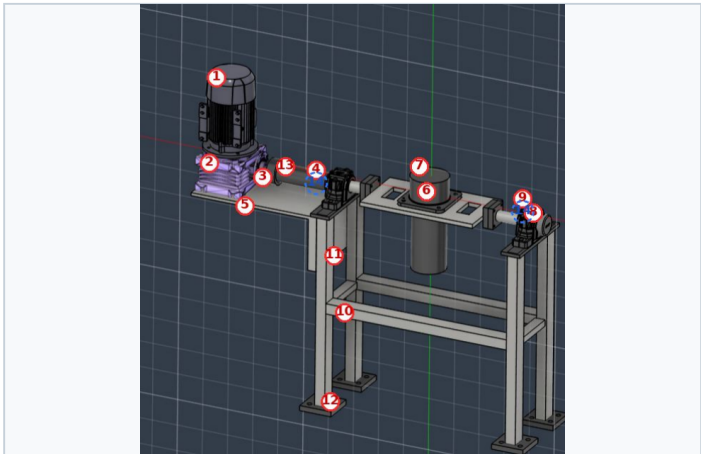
Fixture assembly, Fusion 360. Motor and worm gearbox at left, driven shaft through two plummer-block bearings, part mounted on the central tabletop plates.
